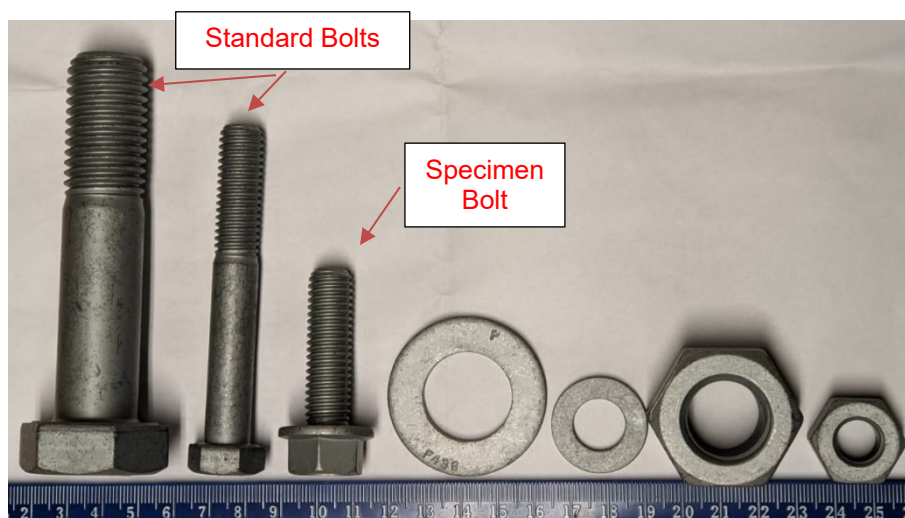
Coated standard and specimen bolts with matching nut, washers
